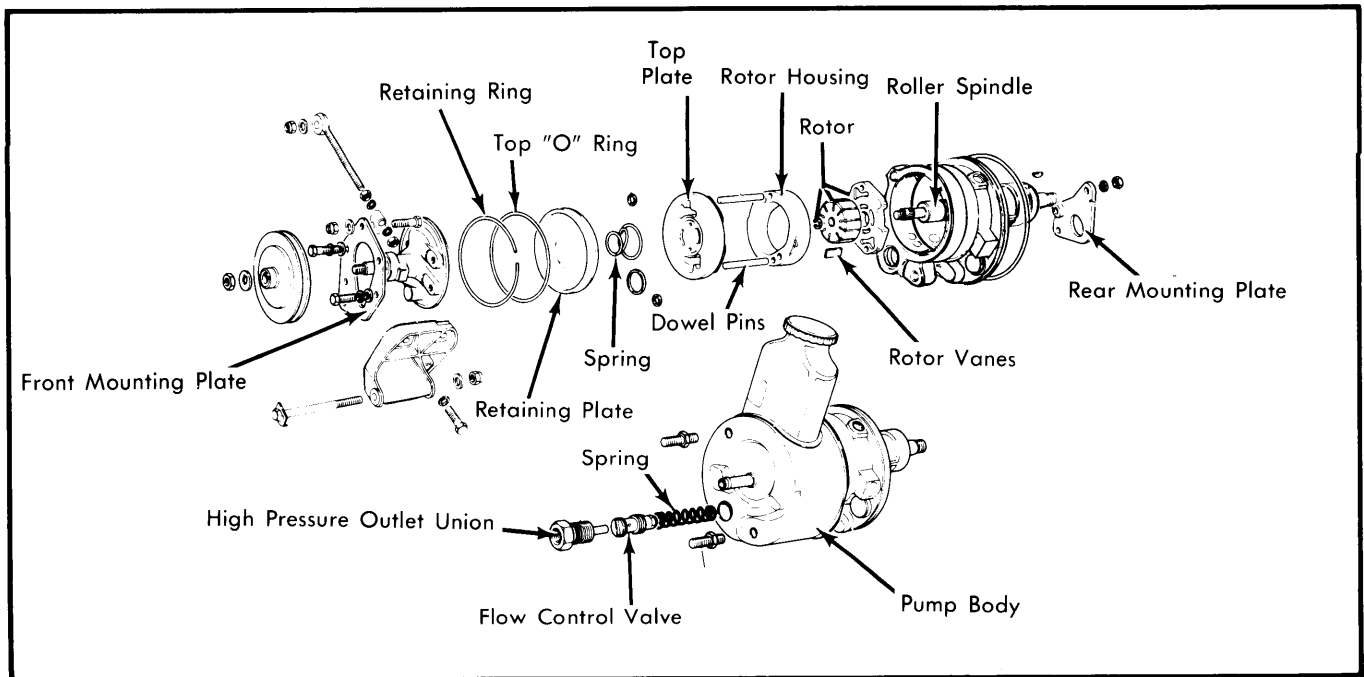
Exploded View of Jaguar and Triumph Power Steering Pump
